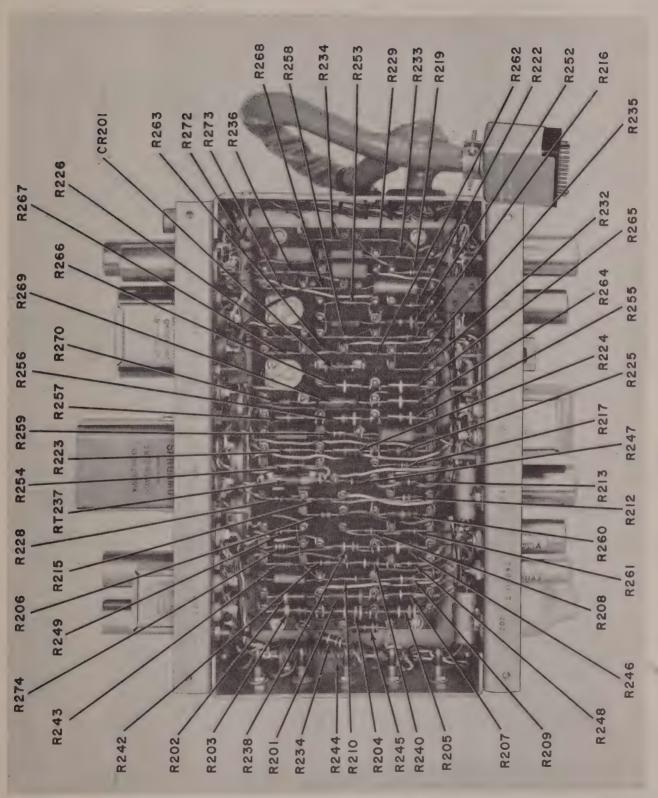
Modulator Chassis, Bottom View (Sheet 2 of 2)
